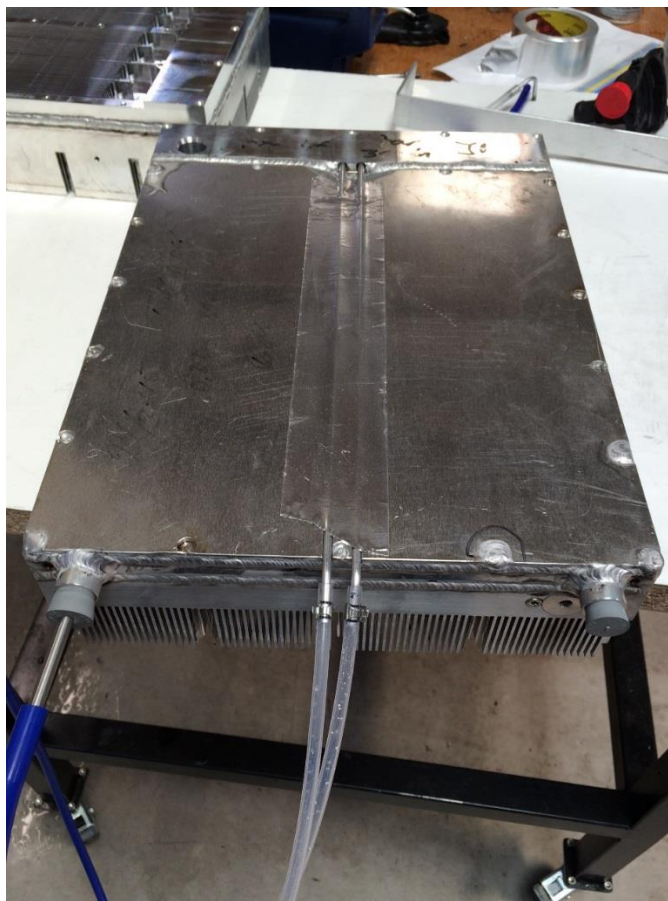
Cooling unit separated, manually welded, pressure test.
